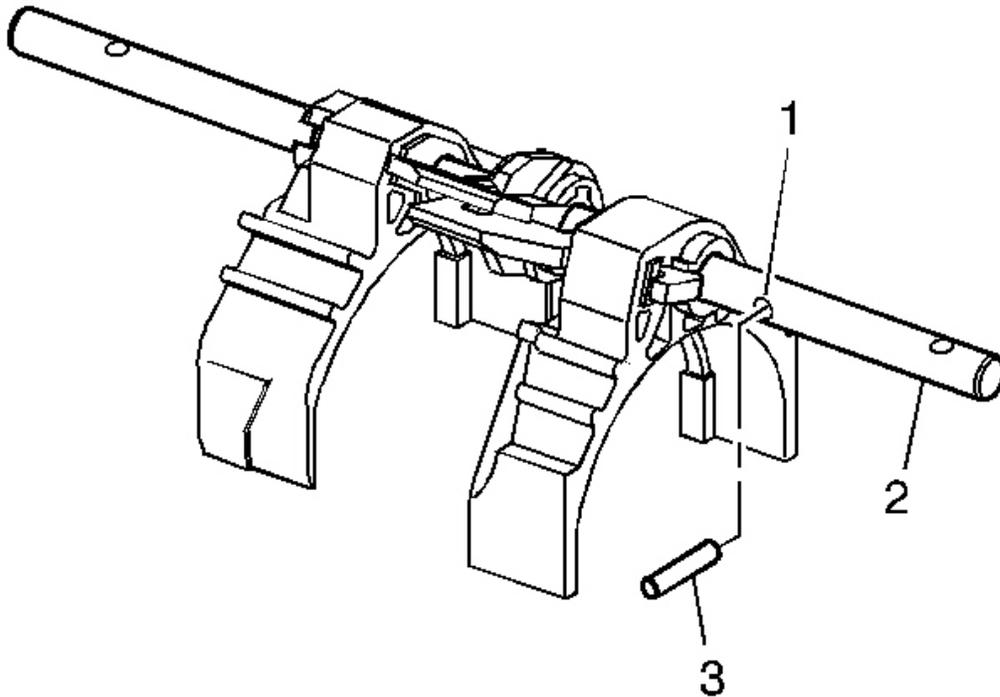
View Of Neutral Return Cam Pin In Shift Shaft
